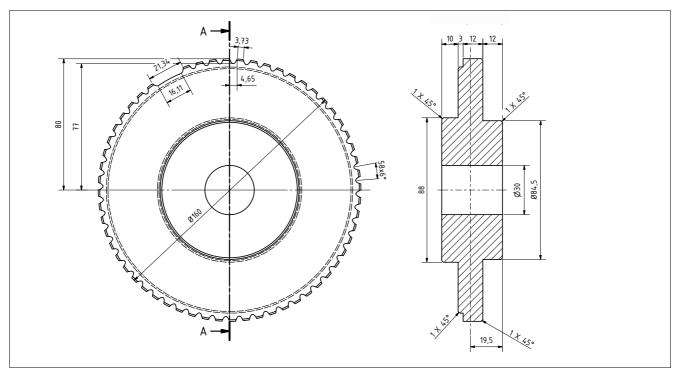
OEM-crankshaft wheel (outer diameter = 160mm)
